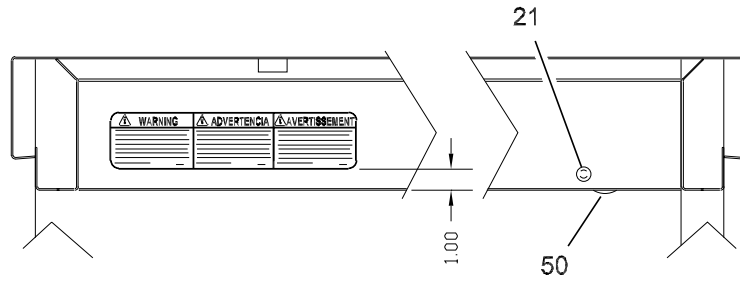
CAB ASSEMBLY (SHEET 3 OF 6)
